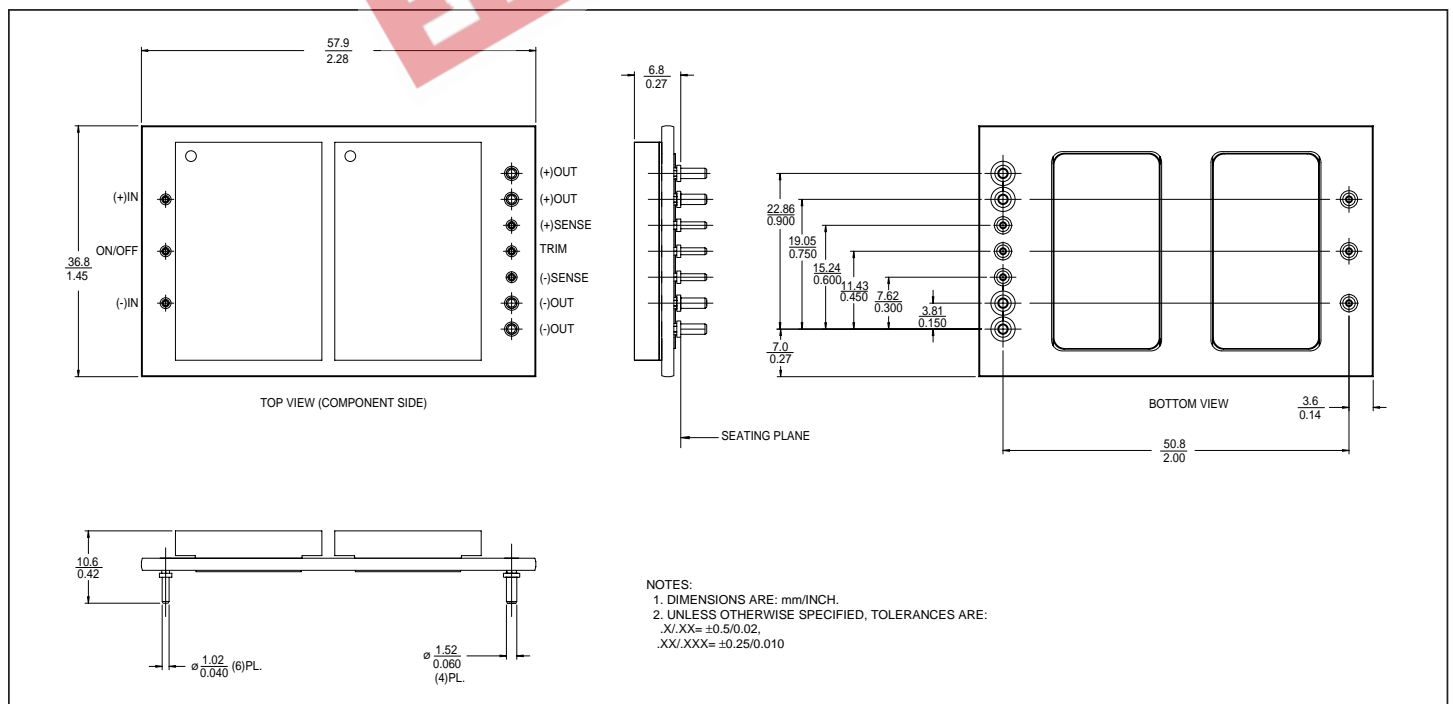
Mechanical outline and PCB footprint information; dual output pin version (package style 2)
